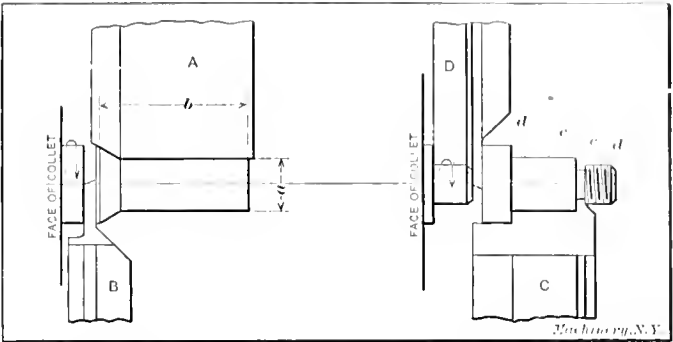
Illustration showing Relation between Smallest Diameter of Work and Length of Forming Tool Fig. 2. Illustration showing a Case where the Cut-off Tool forms Part of the Piece
